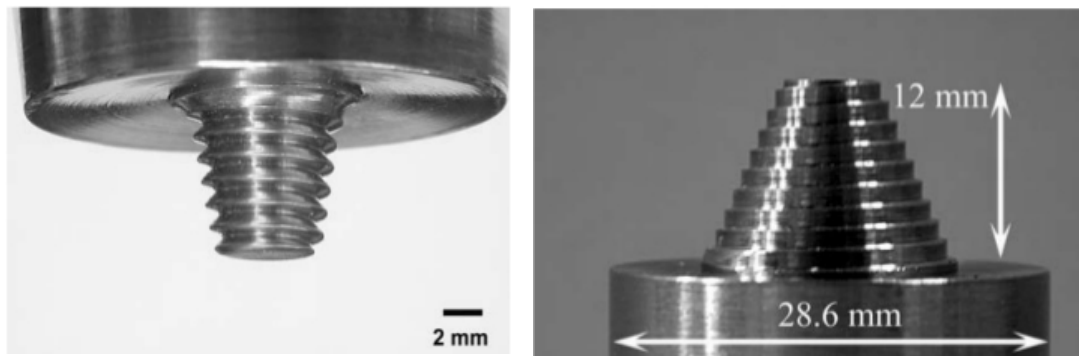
Threaded truncated cone pin with concave shoulder on the left, and a stepped spiral pin design on the right [32]
